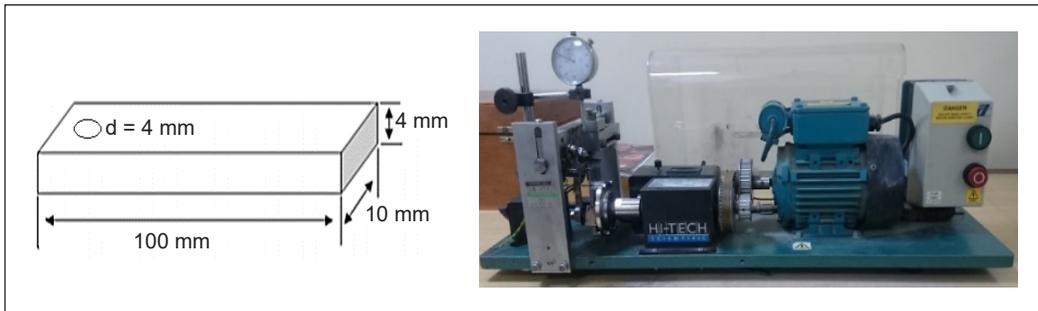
The fatigue test specimen's dimensions with a fatigue machine (HI-TEICH)
